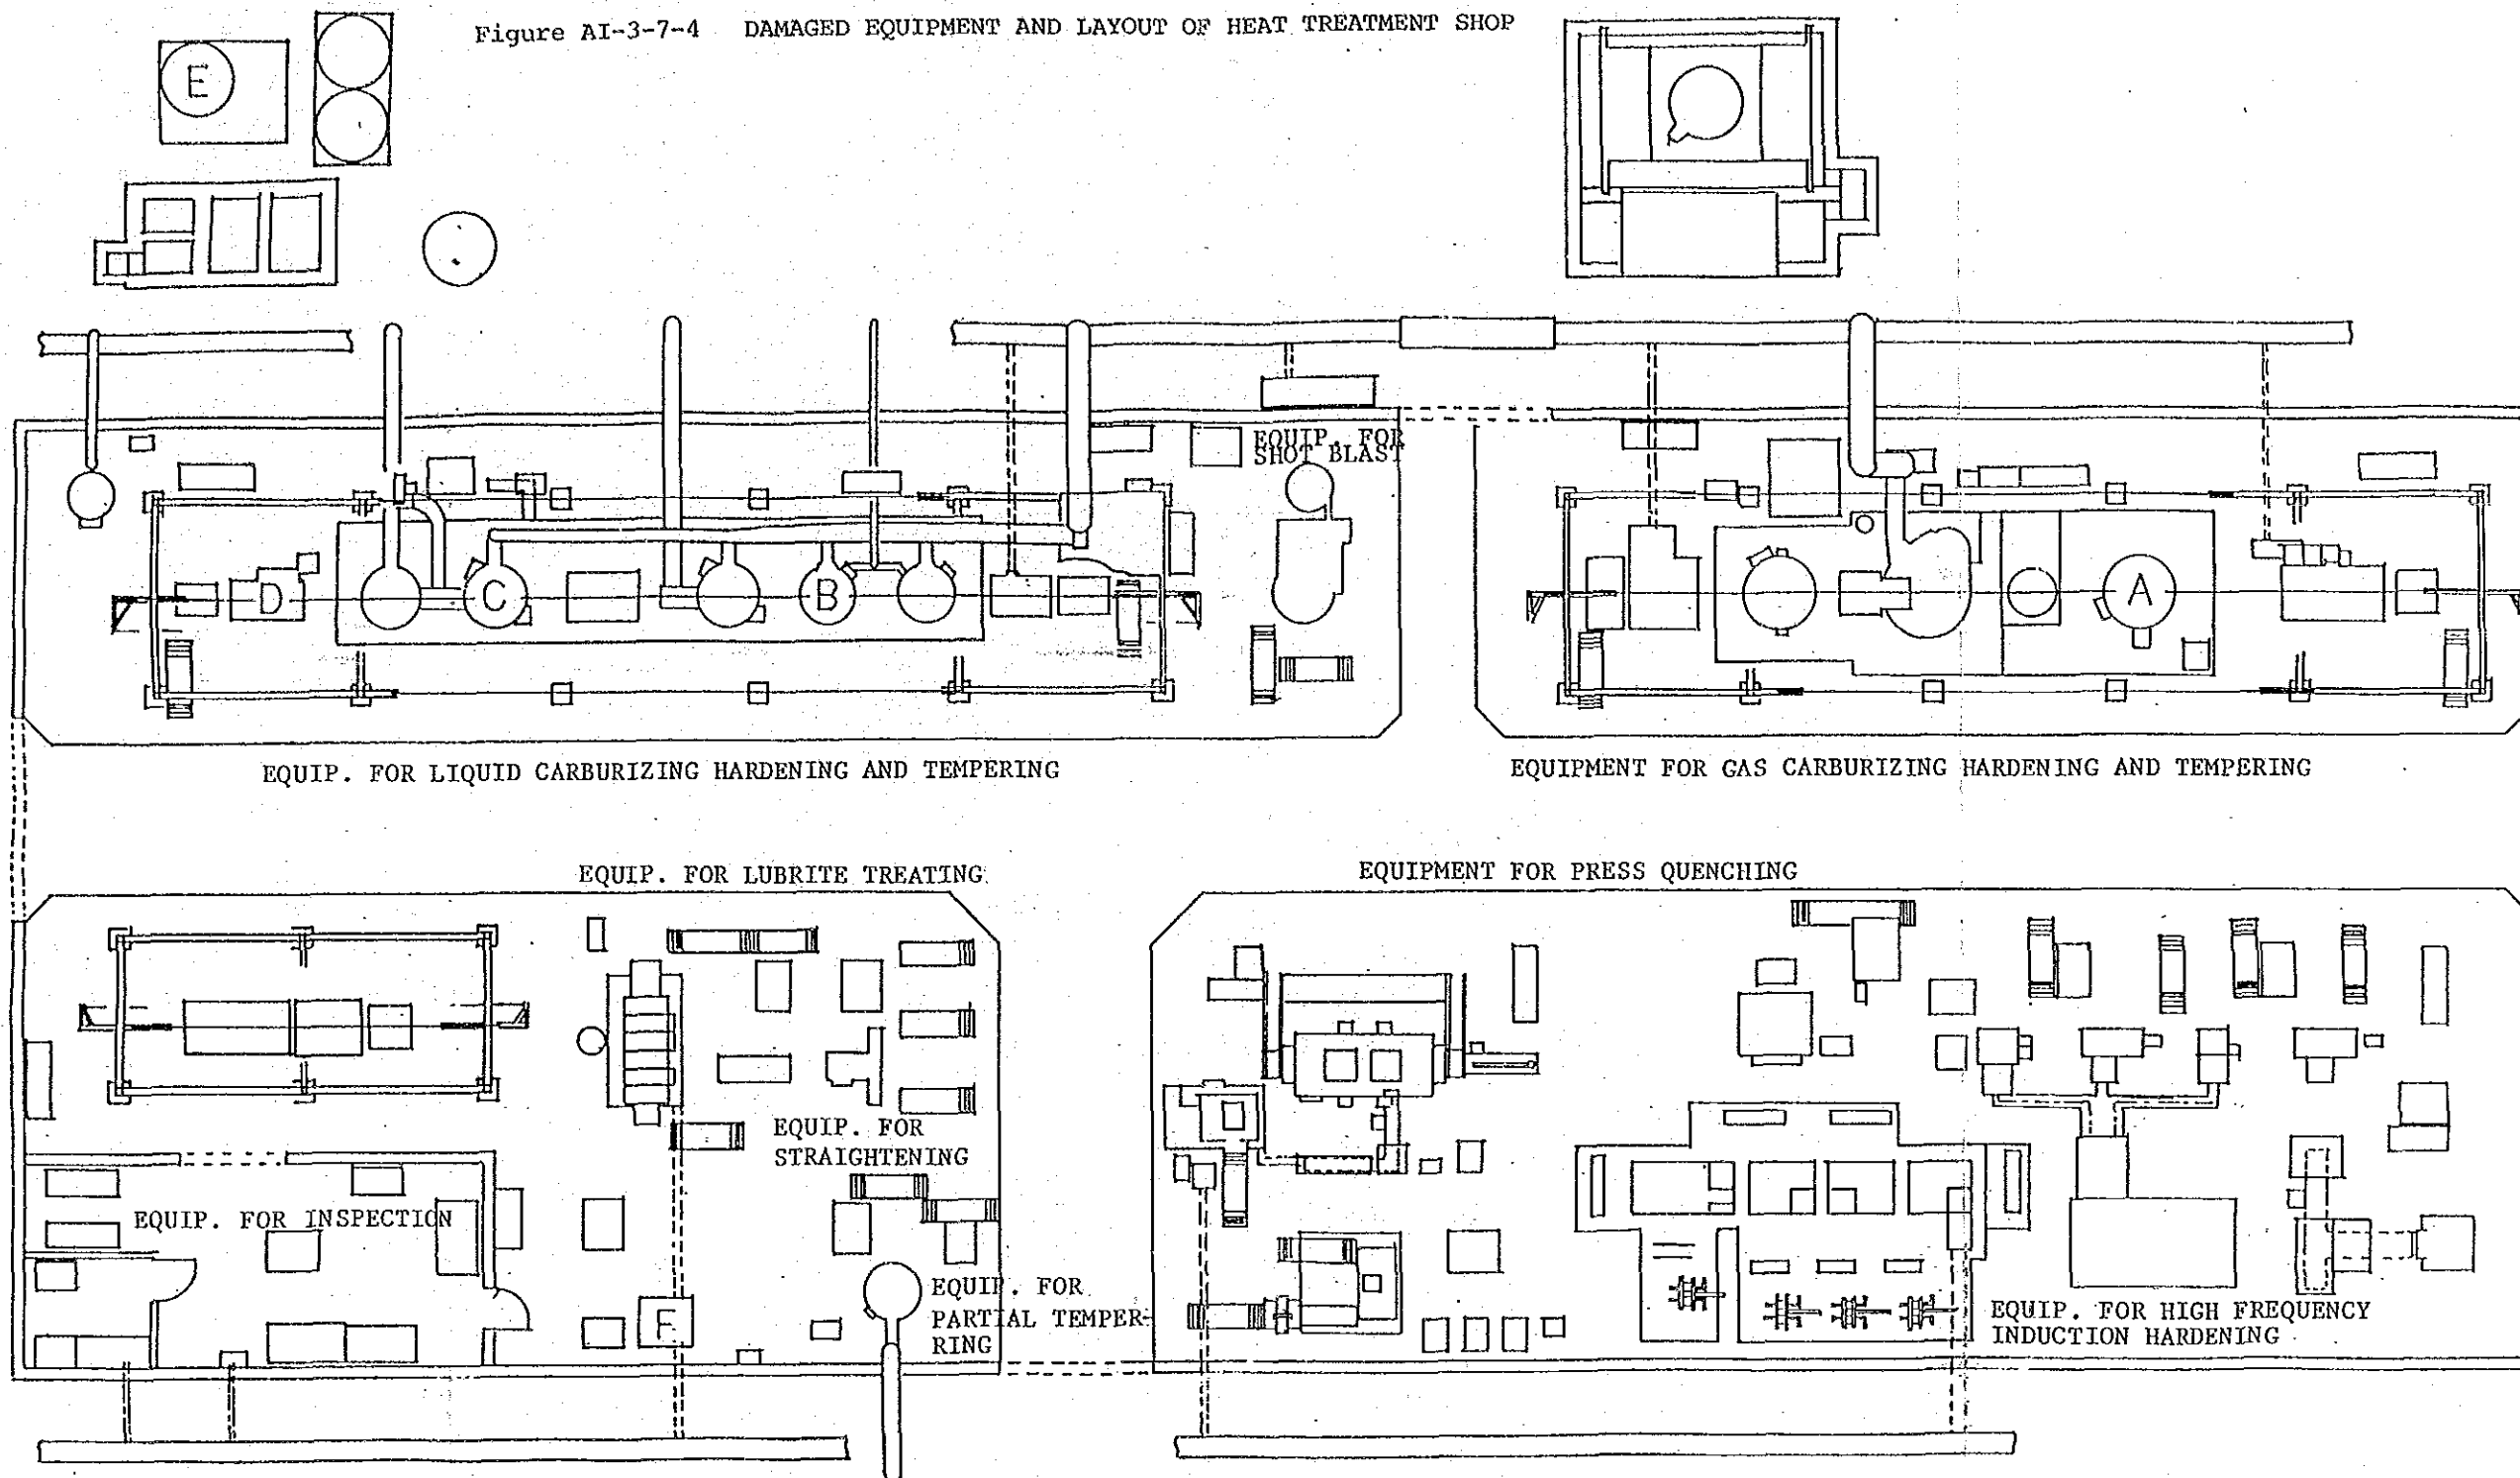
DAMAGED EQUIPMENT AND LAYOUT OF HEAT TREATMENT SHOP
